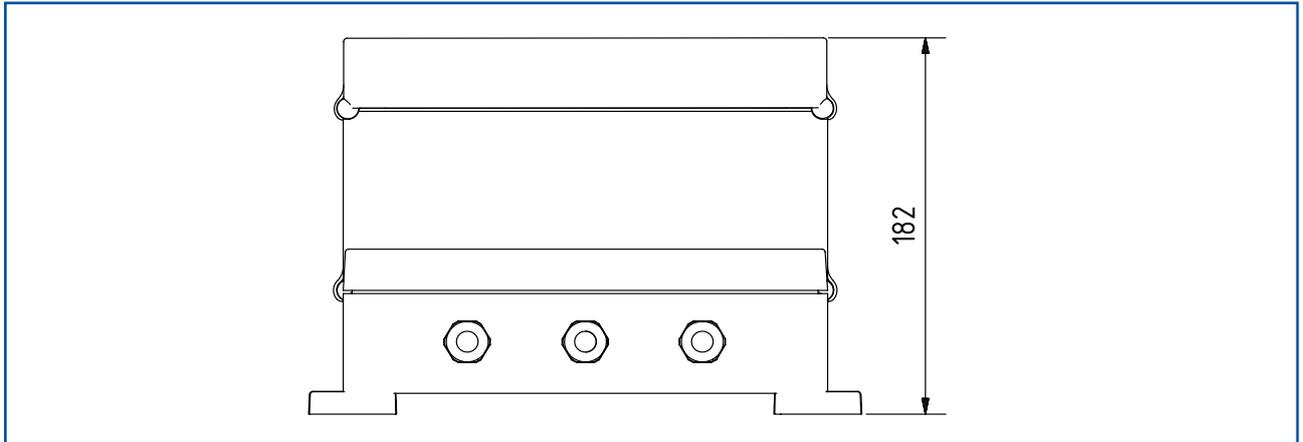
Dimensions of the MSE 300 in the field housing (side view)
